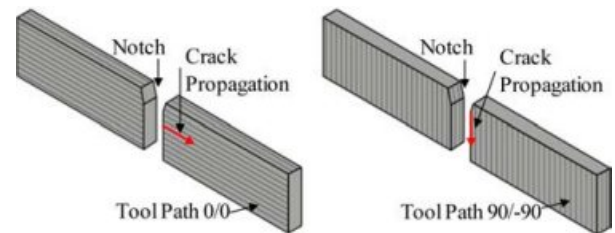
Schematic drawing of crack propagation for tool path.
